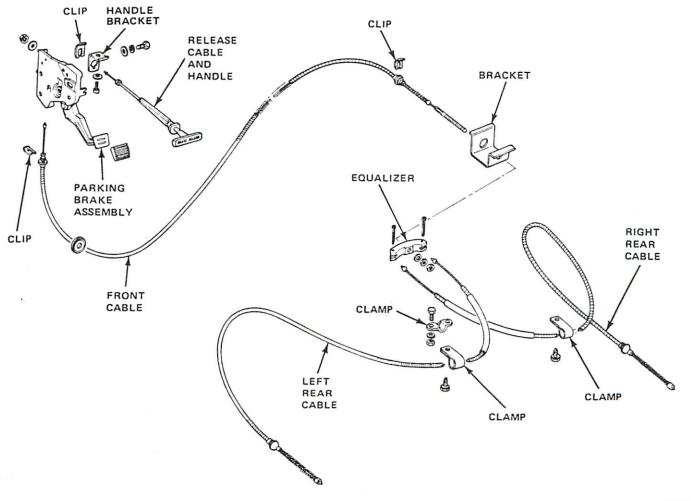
G-3 Parking Brake Assembly—CJ and Scrambler Models
